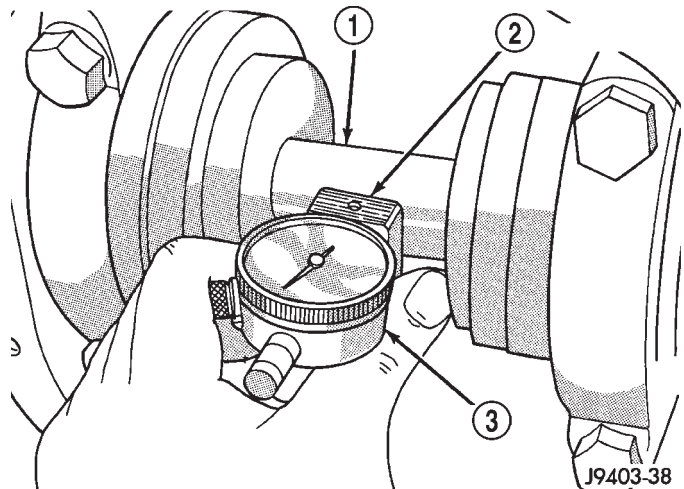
PINION GEAR DEPTH MEASUREMENT
